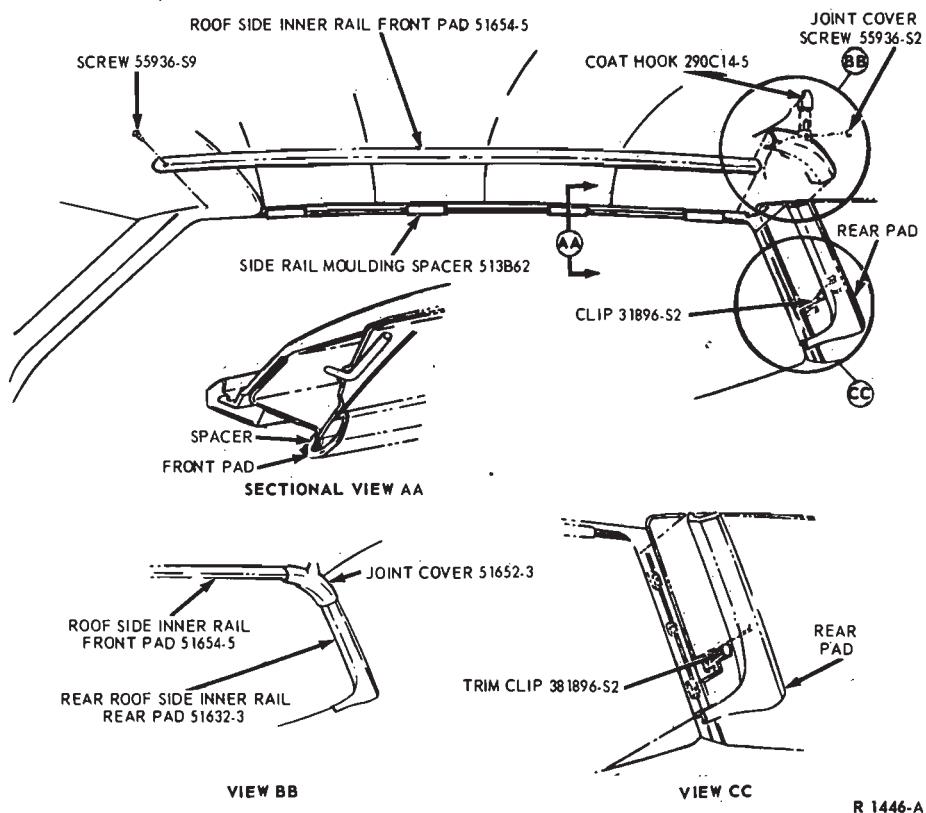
Typical Roof Side Inner Moulding Installation—Continental Mark III Shown
